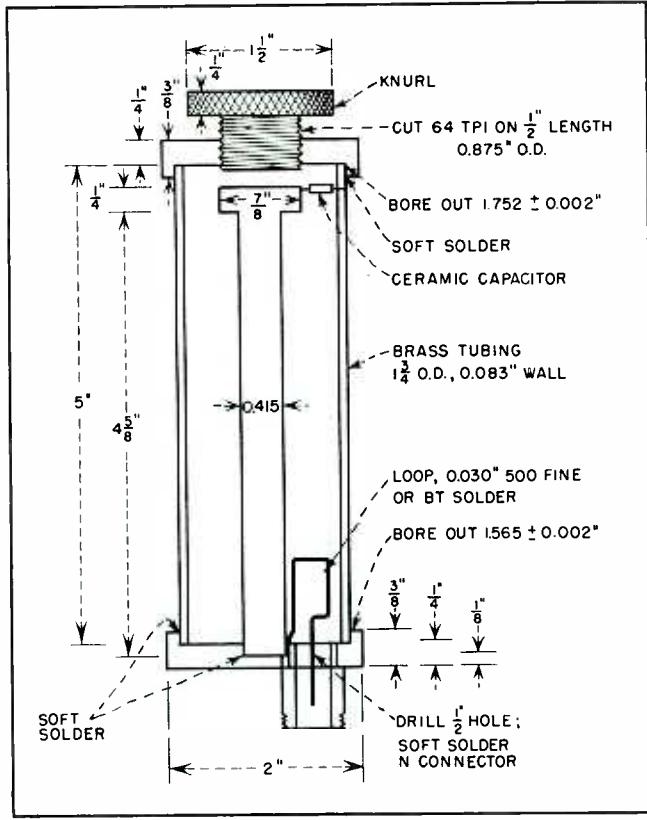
Complete mechanical details of final wavemeter. All parts were silver plated before final assembly
